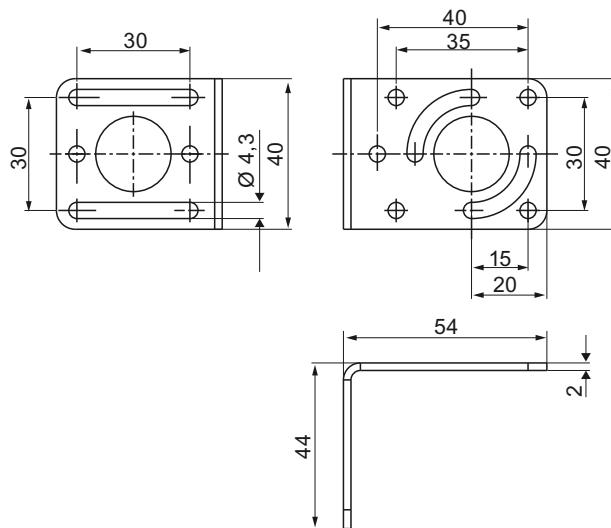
Dimension drawing of mounting plate with mounting bracket
